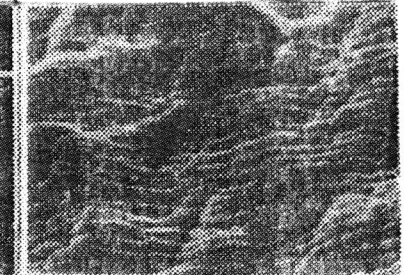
Scanning Electron Fractograph 5700X (1/4 in.)
